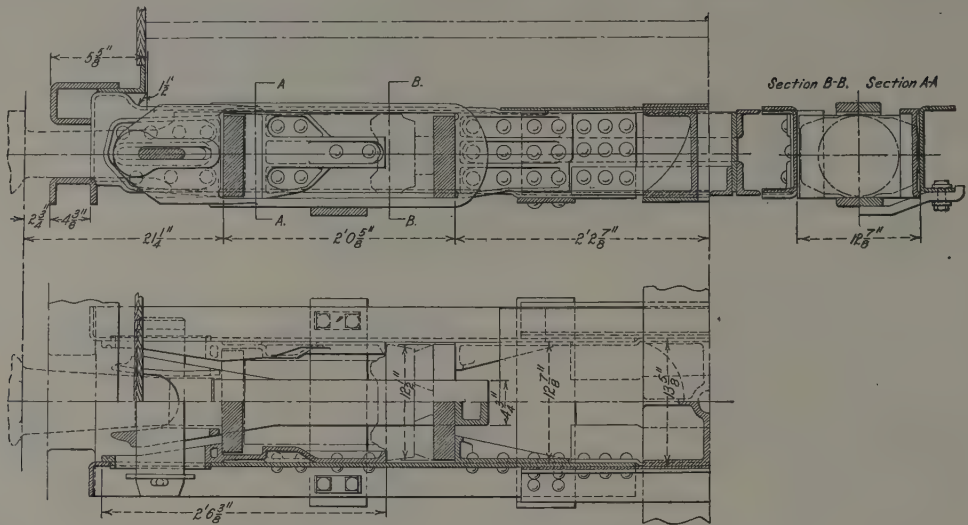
Universal Attachments and Yoke for Sessions Draft Gear, Type K. Universal Draft Gear Attachment Company.
